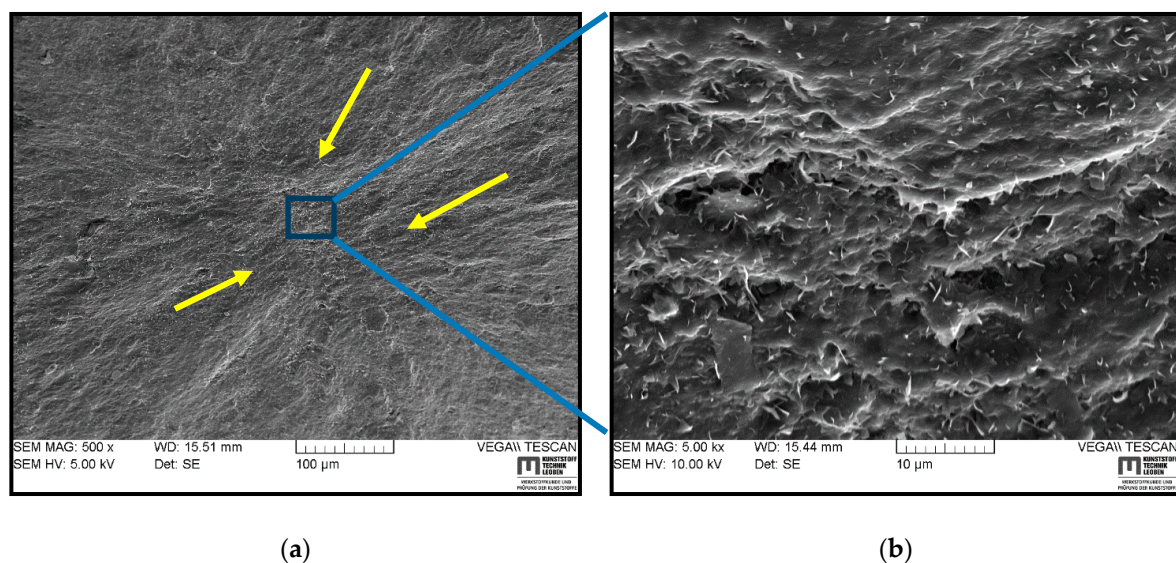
SEM images of a typical fracture surface of HNBR1 in different magnifications: (a) fracture initiation and propagation; (b) magnified view of fracture initiation.
